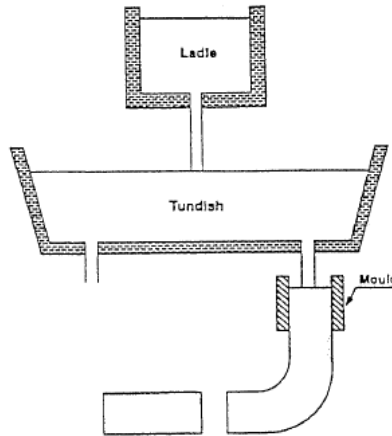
Simple sketch of the continuous casting process. First the molten steel is transferred from the ladle and into a tundish. The tundish then delivers continuously liquid steel to the mould at controlled rate⁴⁰.
